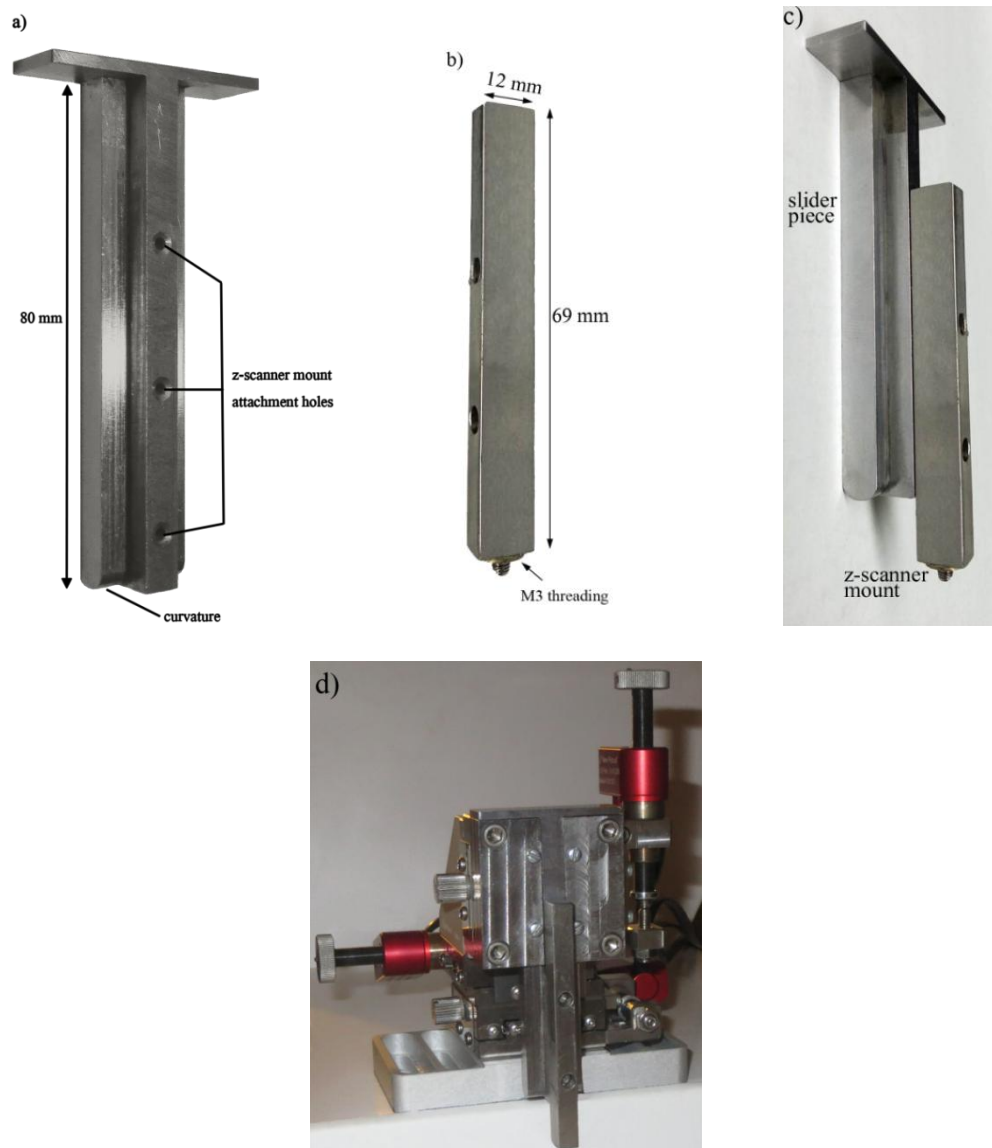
a) Our custom-made slider piece. b) Piezoelectric z-scanner mount. c) Coupling of the slider piece and the z-scanner mount. d) Assembly resulted from insertion the coupled parts in c) into the channel track.
